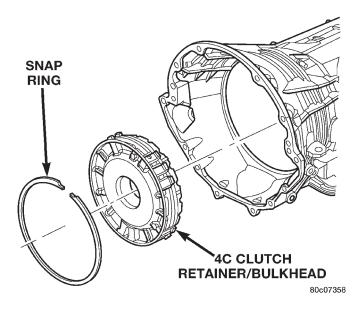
Install 4C Clutch Retainer/Bulkhead
